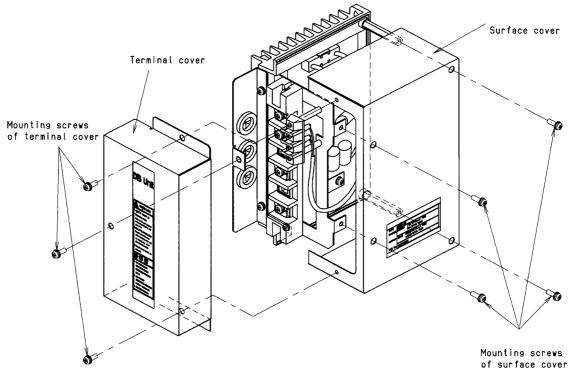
Removal of Terminal Cover and Surface Cover
